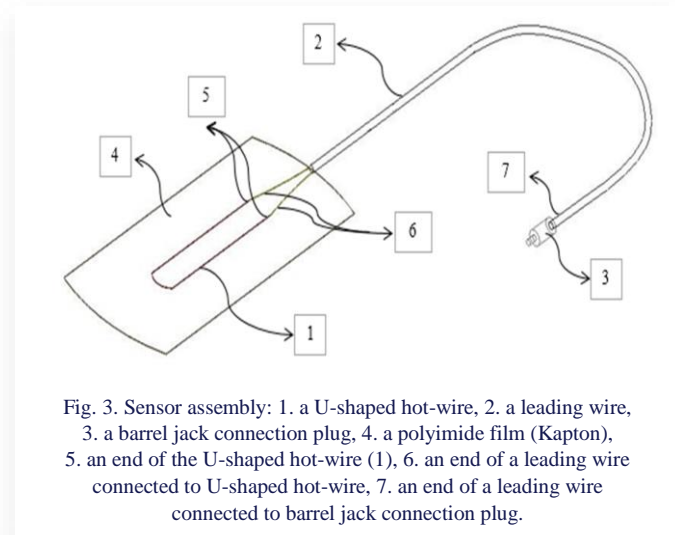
Sensor assembly: 1. a U-shaped hot-wire, 2. a leading wire, 3. a barrel jack connection plug, 4. a polyimide film (Kapton), 5. an end of the U-shaped hot-wire (1), 6. an end of a leading wire connected to U-shaped hot-wire, 7. an end of a leading wire connected to barrel jack connection plug.
